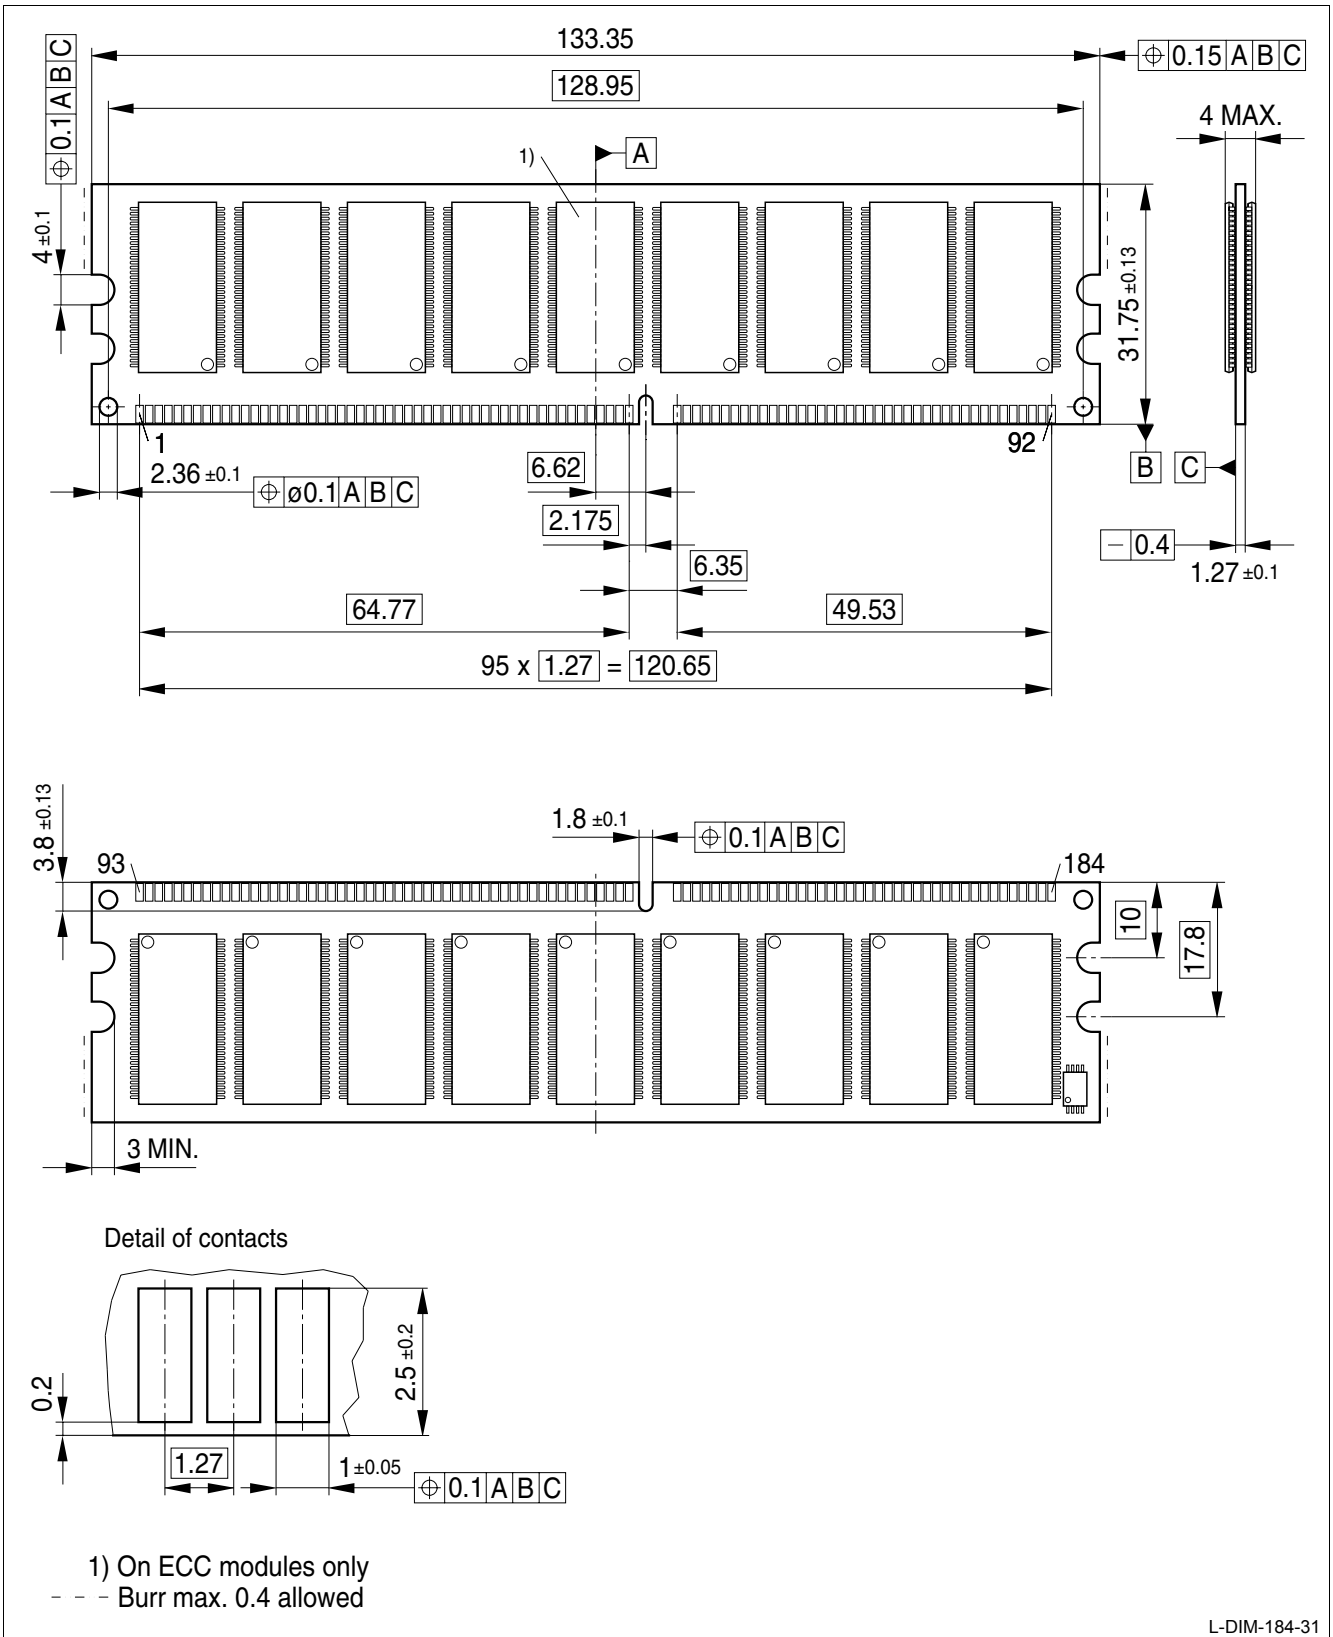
Package Outline - Raw Card B 512 MByte, 2 Ranks ECC Module
